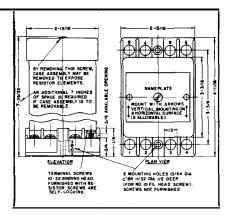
Outline Dimensions and Drilling Plan for VR-825 External Resistor.
